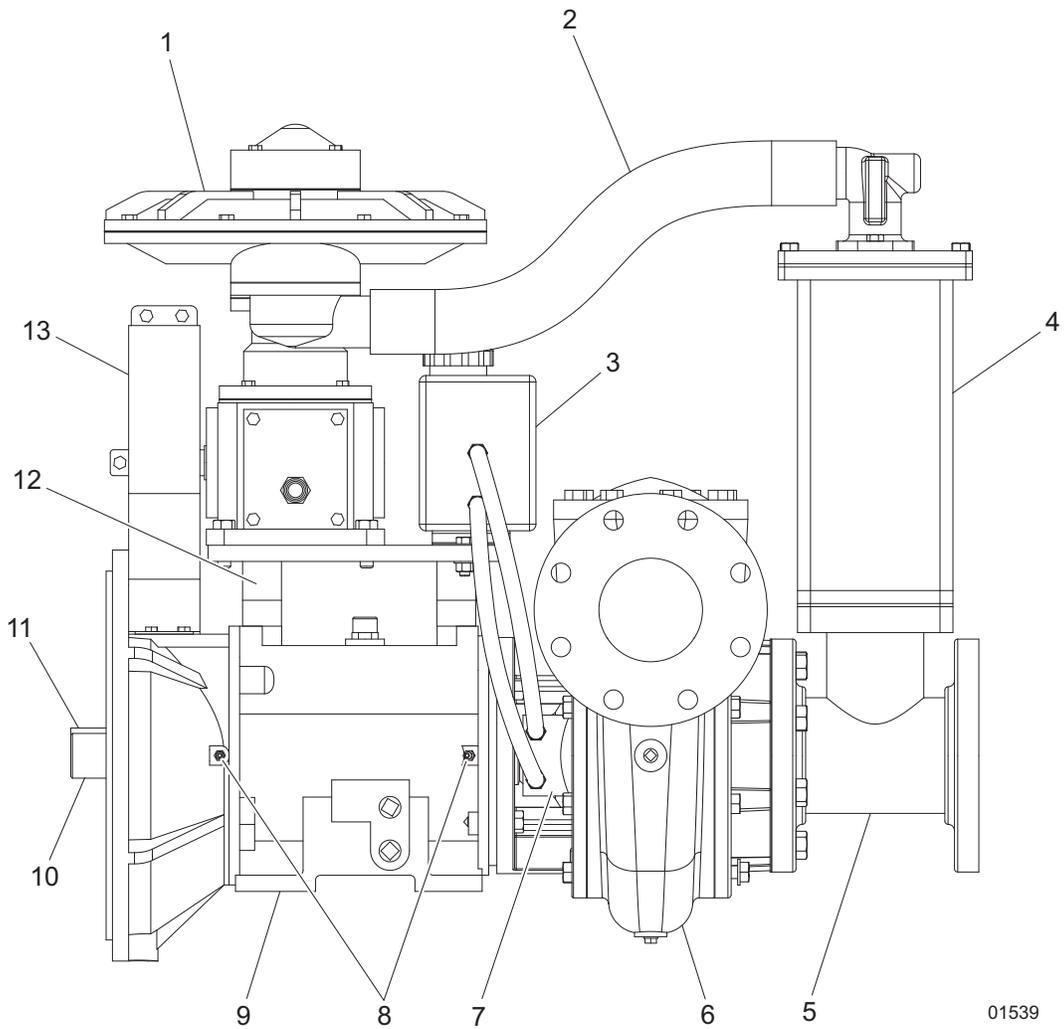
Left Side (4 Inch Diaphragm Vacuum Pump Shown)
